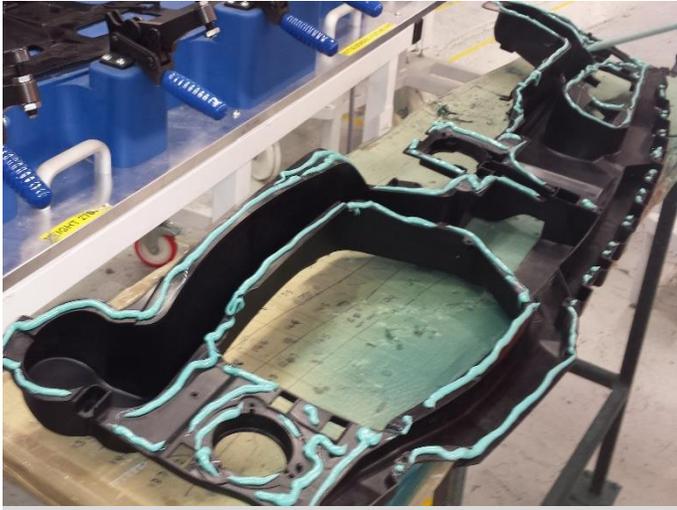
Lightweight glass-filled polyolefin bulk head moulding – being bonded with 3M™ Scotch-Weld™ Structural Plastic Adhesive DP8010NS Blue to an aluminum frame
